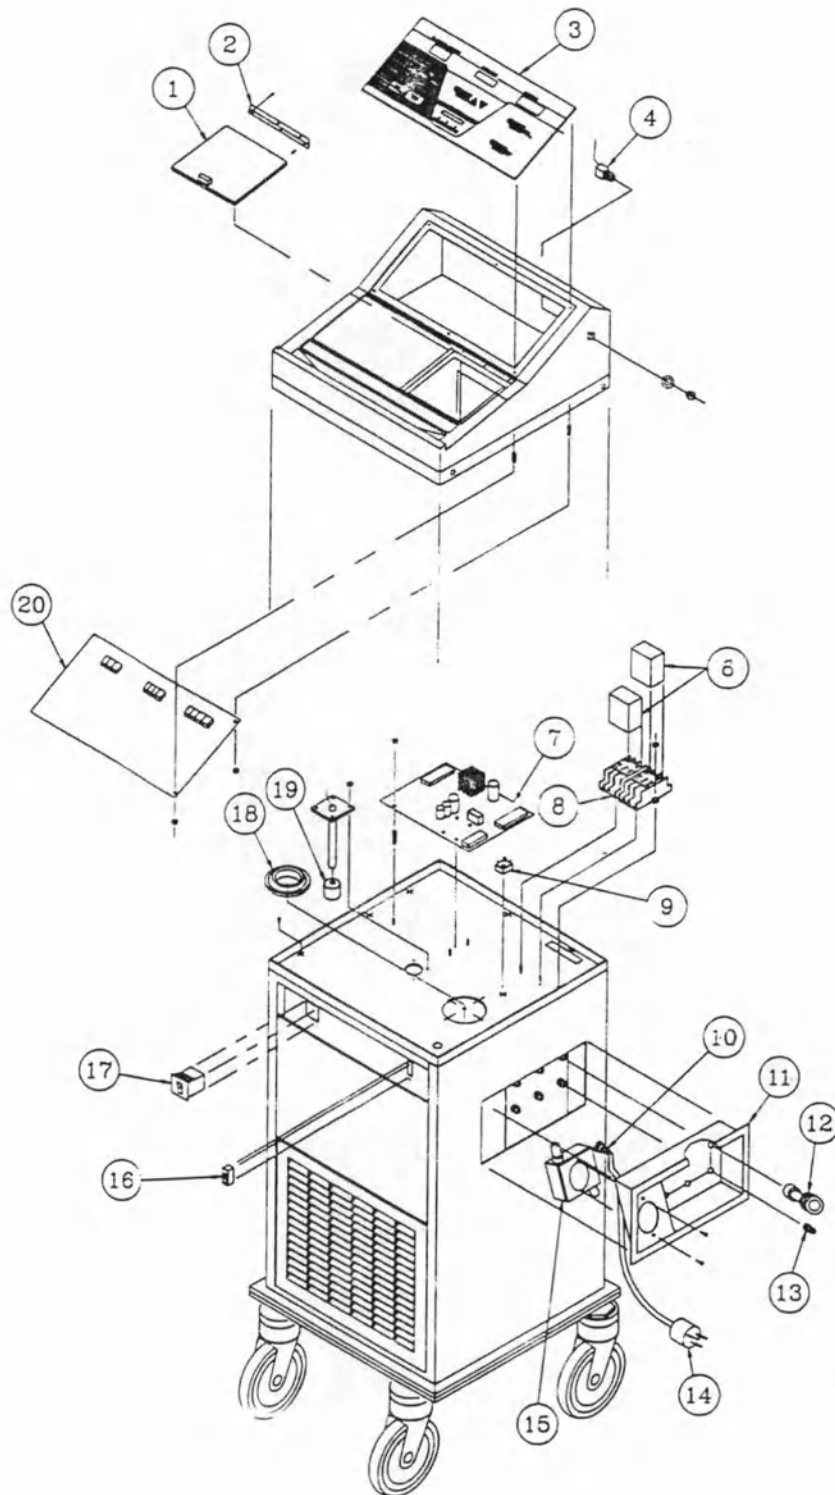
BLANKETROL II INTERNAL EXPLODED - FRONT VIEW
